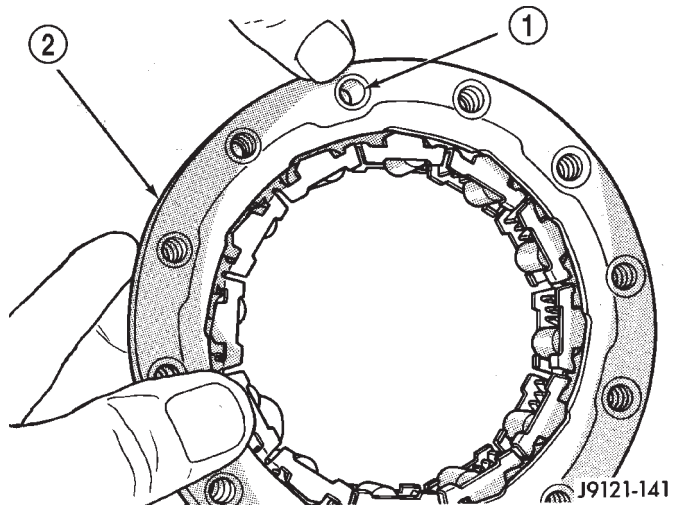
Location Of Non-Threaded Hole In Clutch Cam
